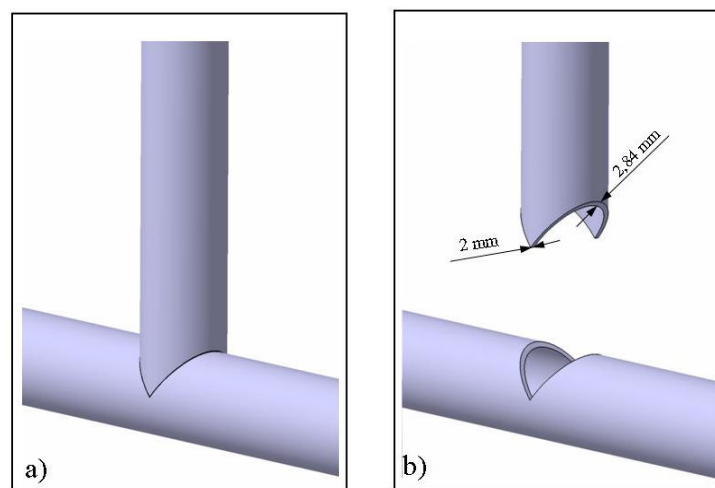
T-joint of round aluminium profiles ($\text{\O} 40 \text{ mm}$), a) joint geometry of the T-joint, b) modification of the thickness along the faying surfaces for welding
